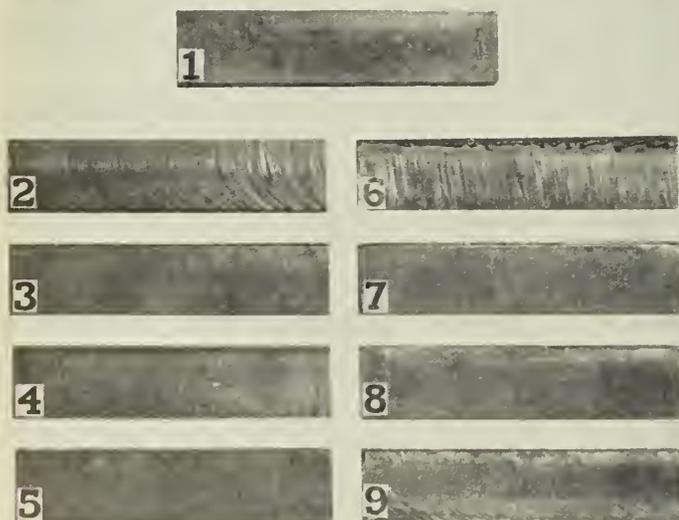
Cut Surfaces Resulting from Correct and Incorrect Technique.
